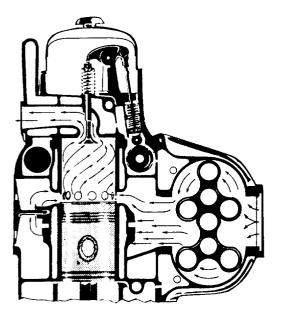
A two-stroke diesel engine cylinder with the piston at the bottom of the power stroke.
